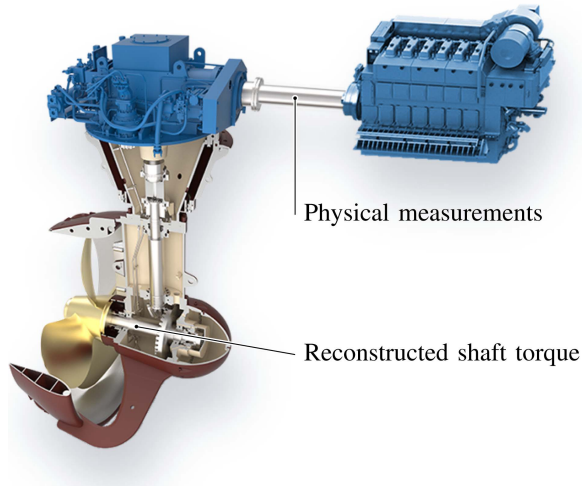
Example of a Z-drive azimuthing thruster. The thruster consists of a driving motor, shafts, couplings, bevel gears, and a propeller. Shaft torque can be measured with physical sensors near the driving motor and then reconstructed at the propeller shaft with input torque estimates produced using the observer.
